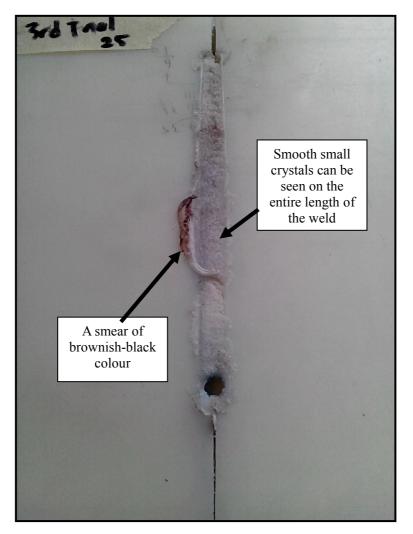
Appearance of Nylon 6 Plates Welded at 25 mm/min
